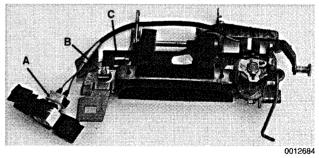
Door handle harness connector (A); retaining pin locking clip (B); exterior trim locking plate (C). Handle assembly shown removed from door.
